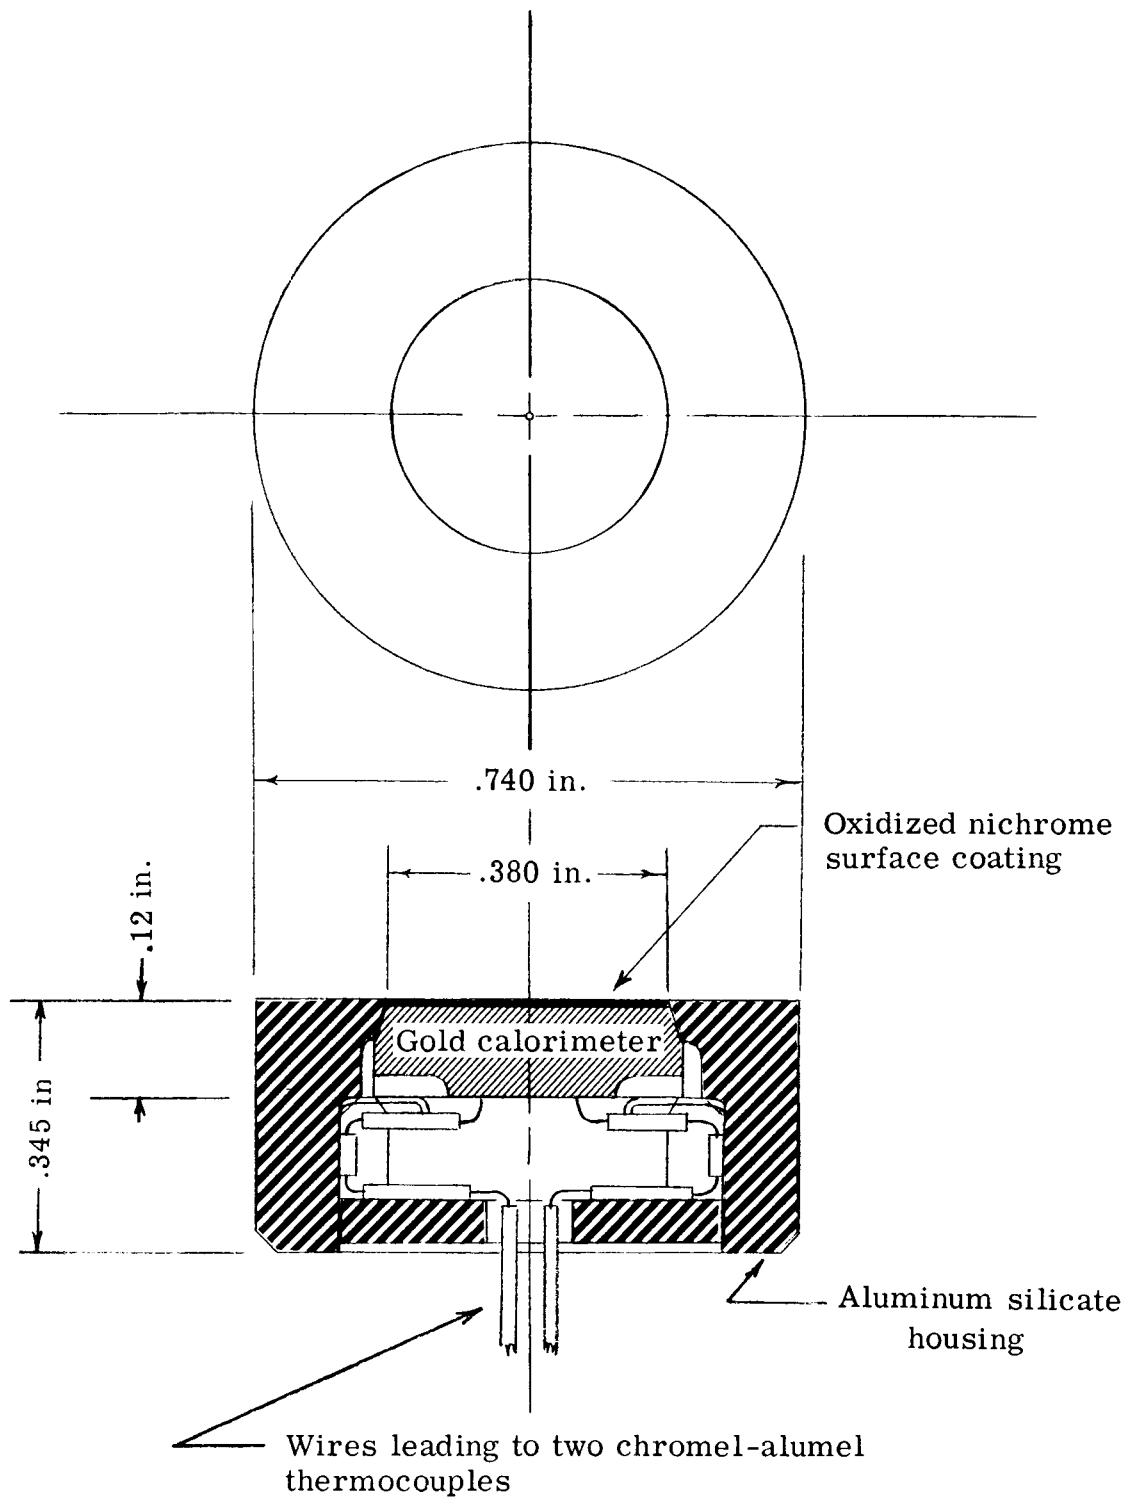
Schematic drawing of gold calorimeter and insulating housing.
